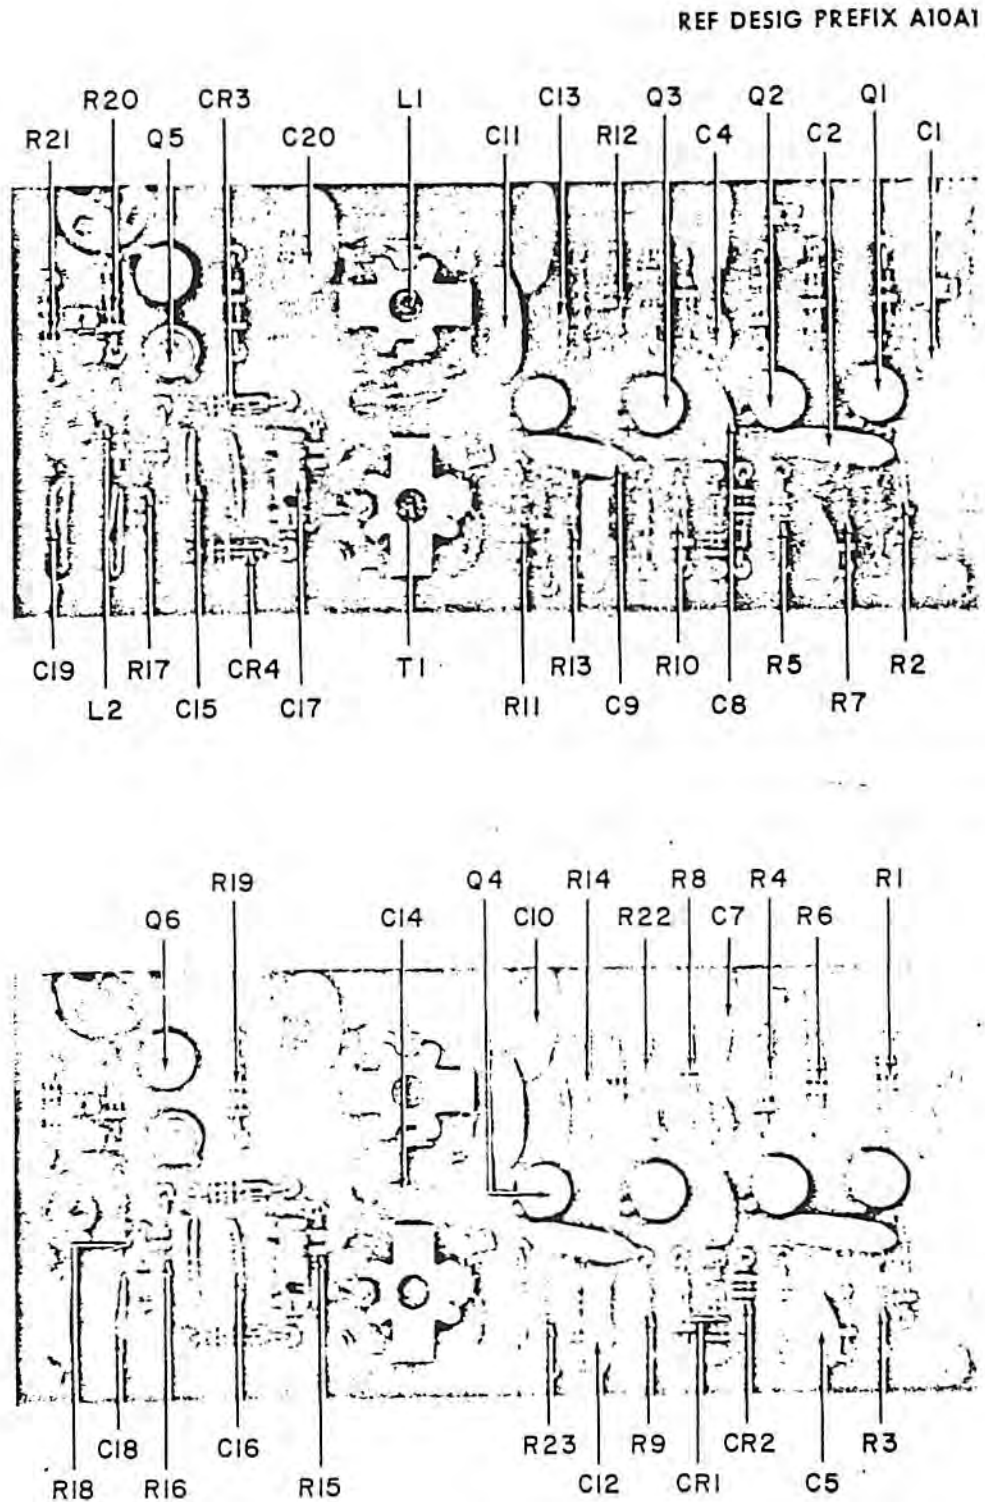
Part 14206 Printed Circuit Board, Component Locations
